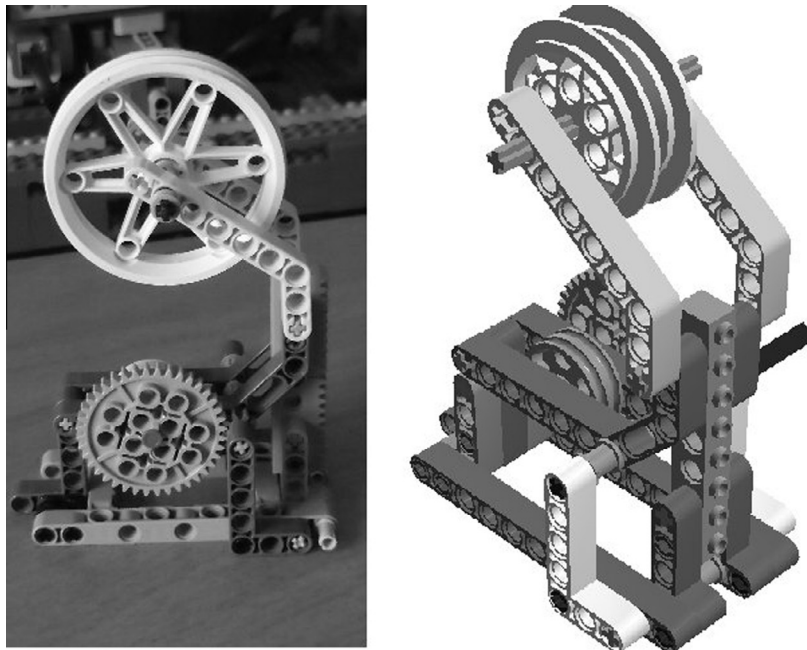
The 3D design of the extruder (right) and the Lego-built one (left).
